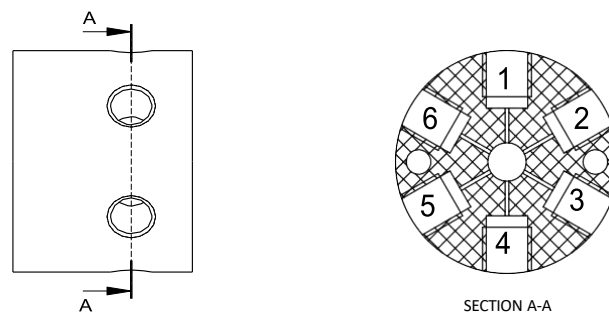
Section view of the PCTFE valve seat with port numbering - VD1-6
